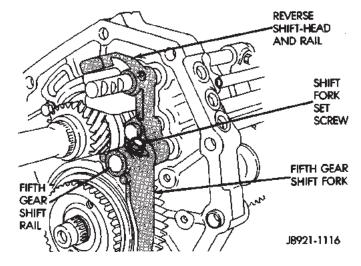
Install Fifth Gear Shift Fork Retainer Bolt
